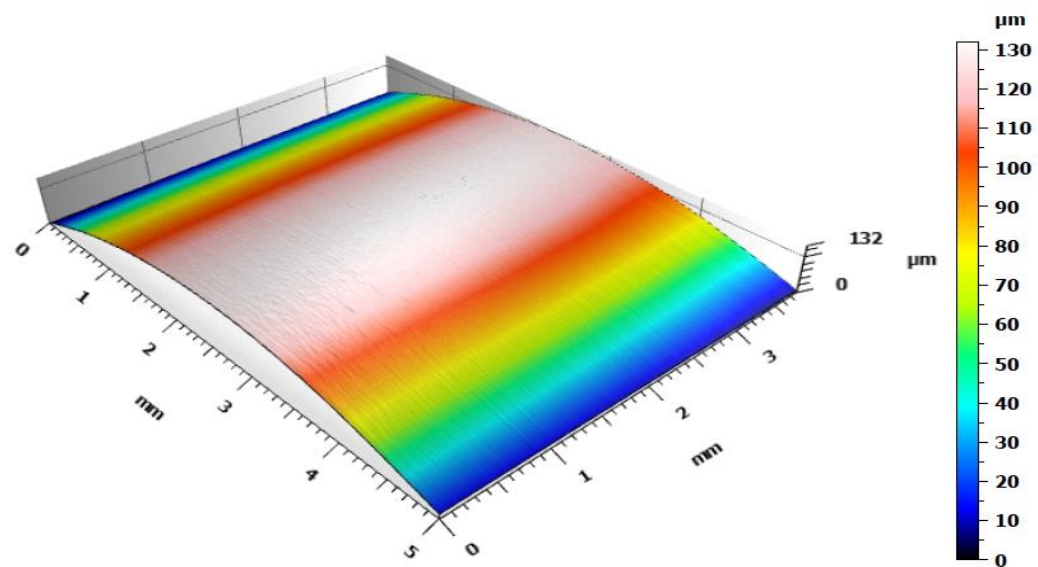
SKF Bearing, inner raceway 3D surface scan.
